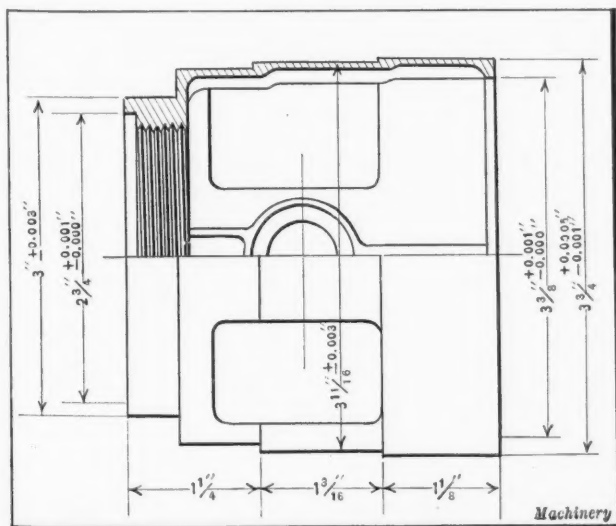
Body of an Aluminum Alloy Piston, the Closed End of which consists of a Separate Cap screwed into the Body
